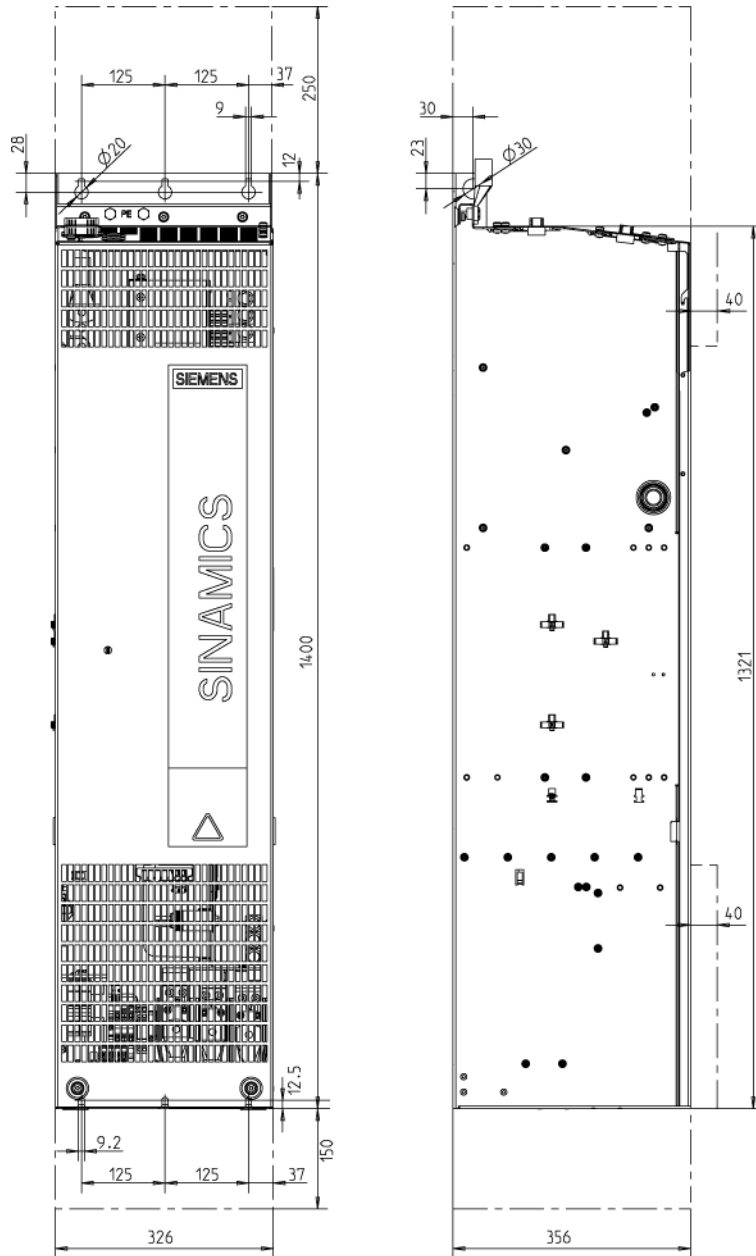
Dimension drawing Active Line Module, frame size FX Front view, side view
